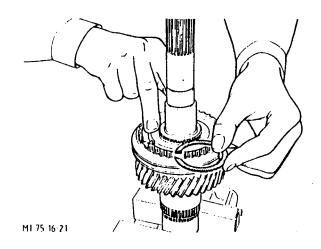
Select circlip (5th/reverse gear synchronizer MT-75 shown without 4x4).
